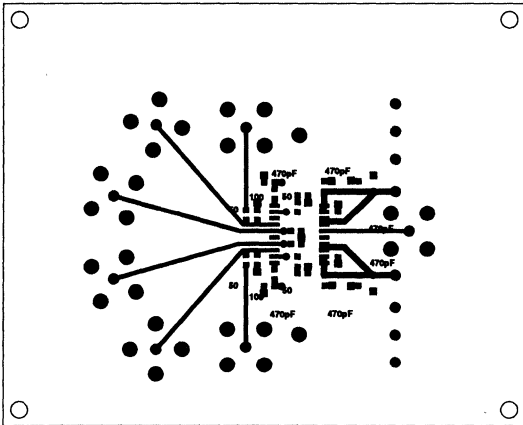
1X PC BOARD LAYOUT (BOTTOM VIEW)
